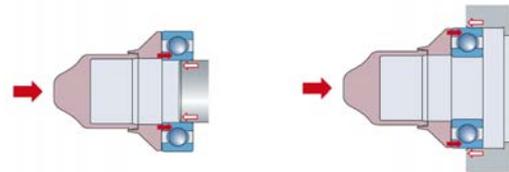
A sleeve should be used when pressing a bearing onto a shaft or into a housing (Courtesy of SKF, 2011, SKF Maintenance and Lubrication Products, © SKF Group)
